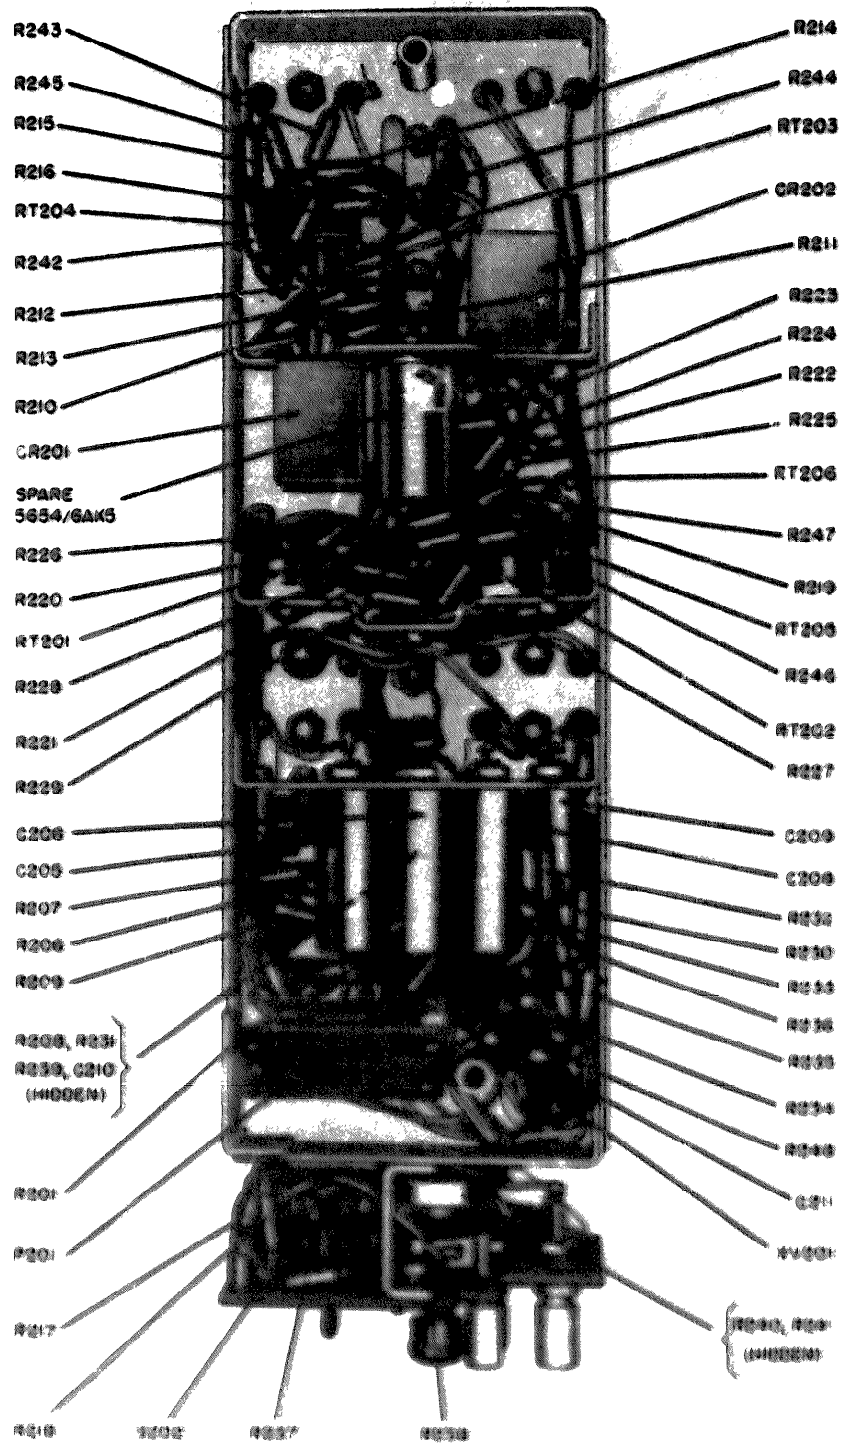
Channel 4 motor plug-in assembly, bottom view, device element location diagram.
